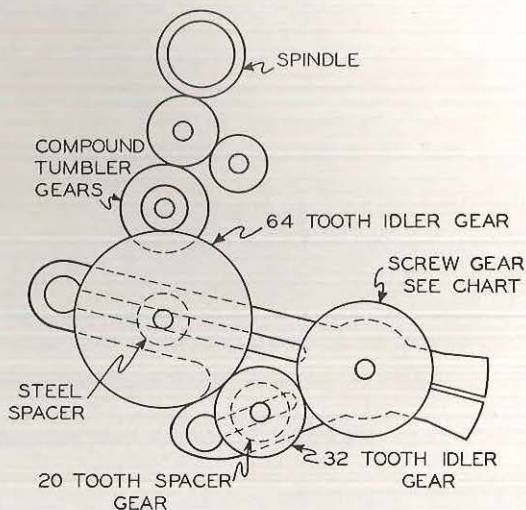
Gear set-up for 36 through 64 threads per inch. (see page 162).
